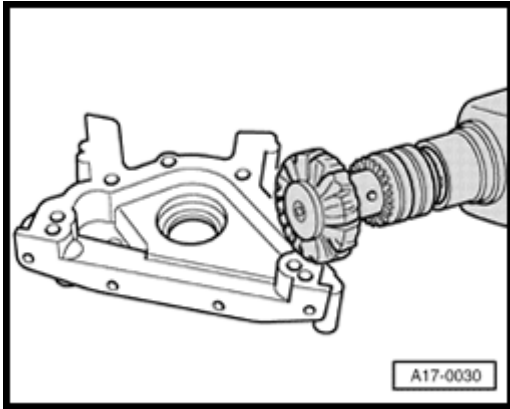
Removing Sealant Remains On Sealing Flange With Rotating Plastic Brush
